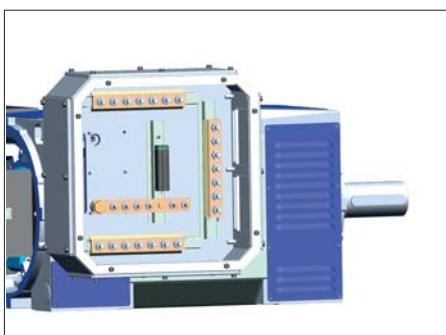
Terminal board for motor sizes 250 (\_XL).
